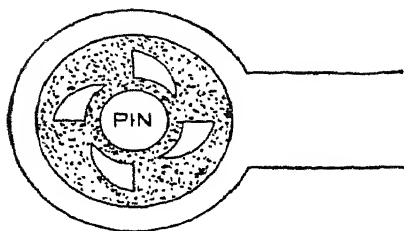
Steel Plate Bushing Used between Butt Knuckles.
